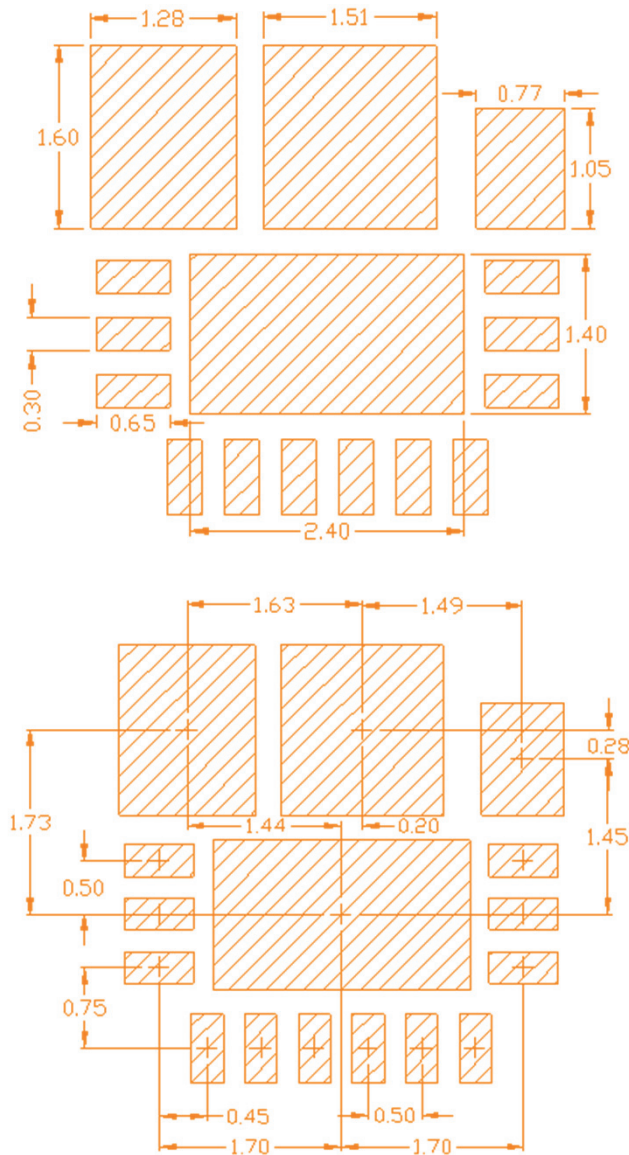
PCB Metal Pad Spacing (all dimensions in mm)
